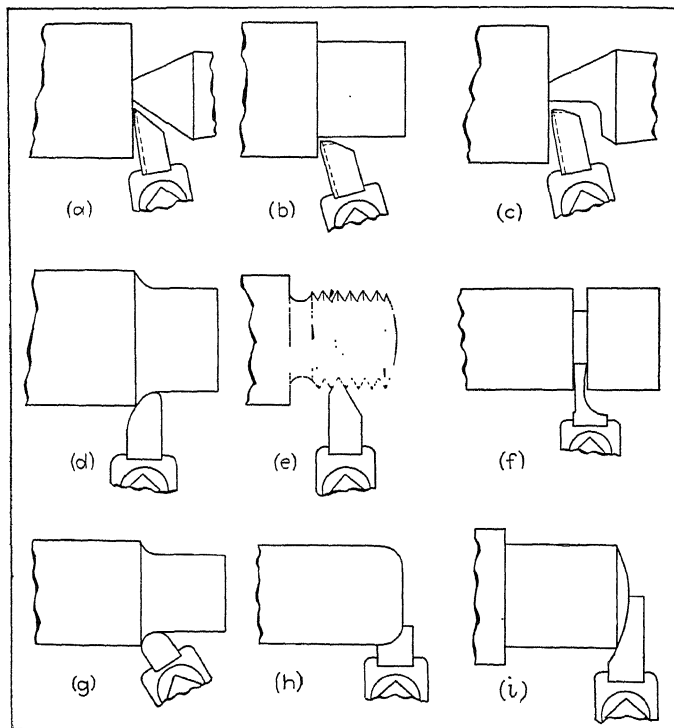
Some of the shapes to which tool bits may be ground. *a*, facing tool or side tool; *b*, shoulder tool or corner tool; *c*, shoulder tool, same as *b*, used with half center for facing; *d*, turning tool; *e*, thread tool; *f*, cutting-off or parting tool; *g*, round-nose tool (smaller sizes used for necking); *h*, corner rounding or radius tool; *i*, crowning tool. Note: Grinding a tool point on both ends of a tool is not economical.
